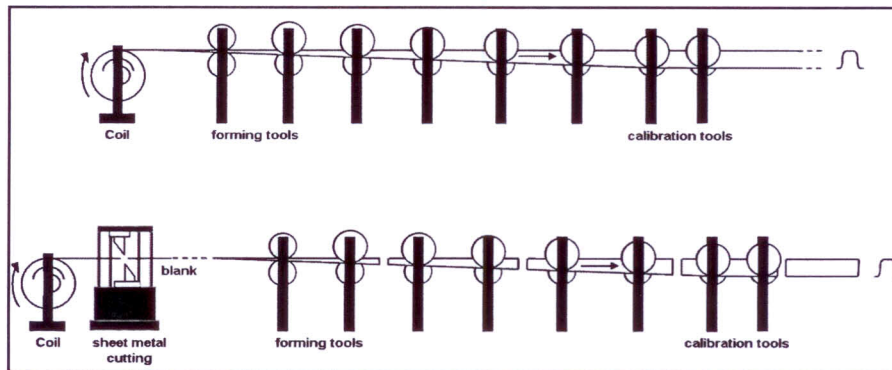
Schematic showing roll forming; top: endless, bottom: blank
